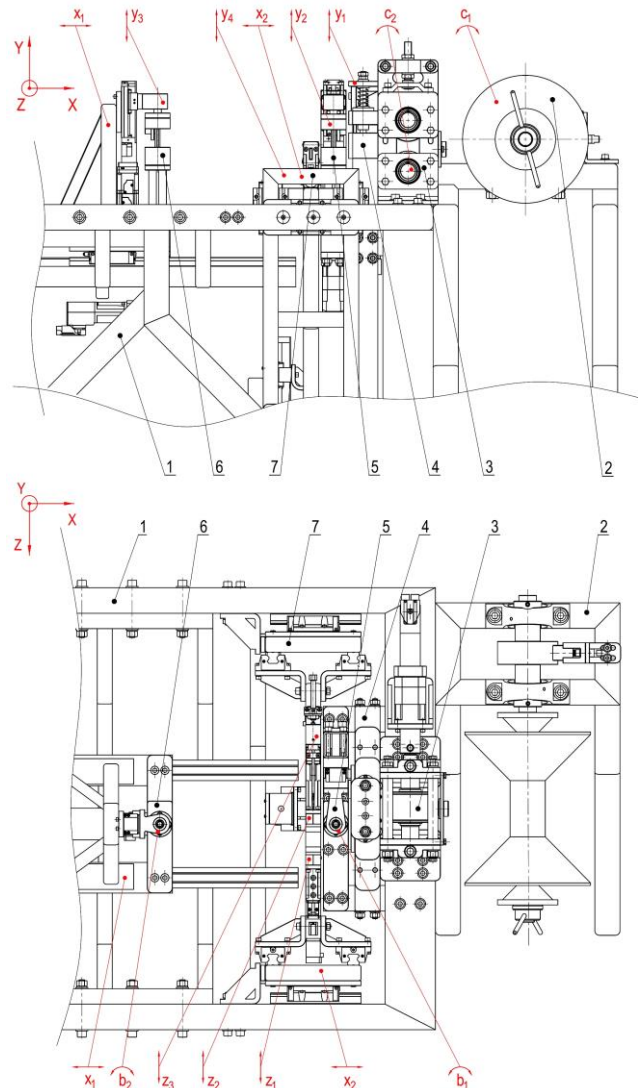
Kinematic diagram of machine: 1 – main frame, 2 – unwind unit, 3 – roll feeder, 4 – shear cutter, 5 – fixed gripper, 6 – sliding gripper, 7 – welding assembly; Parameters: x_n – translation in the direction of axis X, y_n – translation in the direction of axis Y, z_n – translation in the direction of axis Z, b_n – rotation in XZ plane, c_n – rotation in the YZ plane
